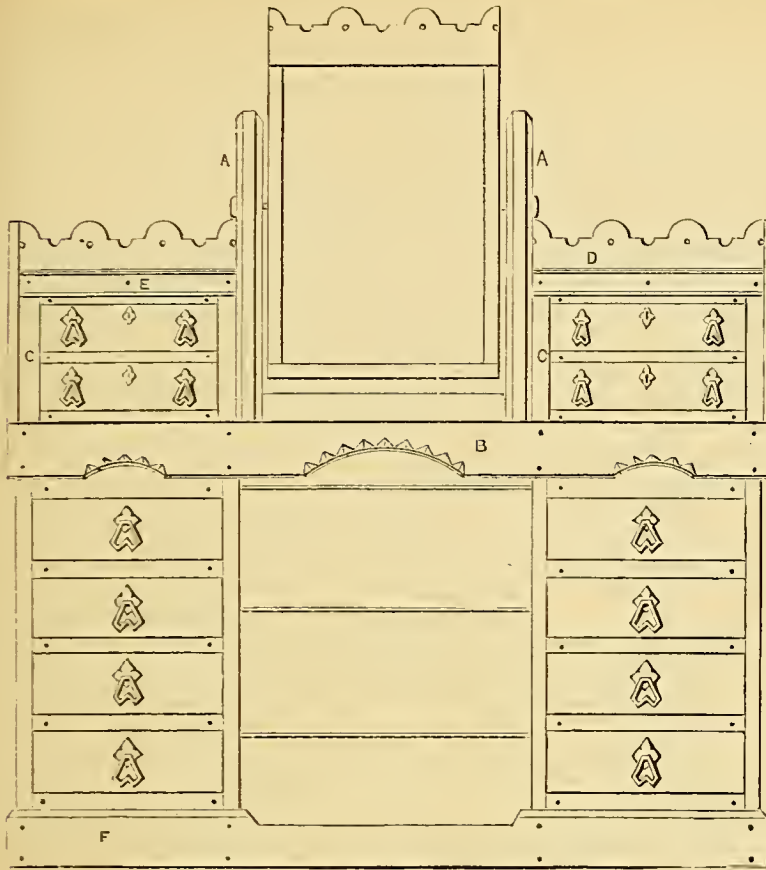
FRONT ELEVATION OF DRESSING TABLE.
